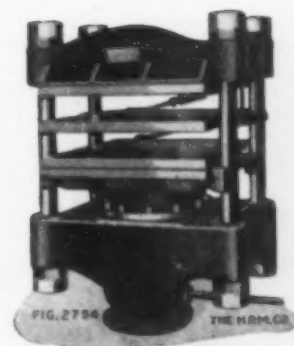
Hot plate press of the upward plunger type Molding bakelite, etc., using plain hand molds also for molding and vulcanizing rubber goods.
